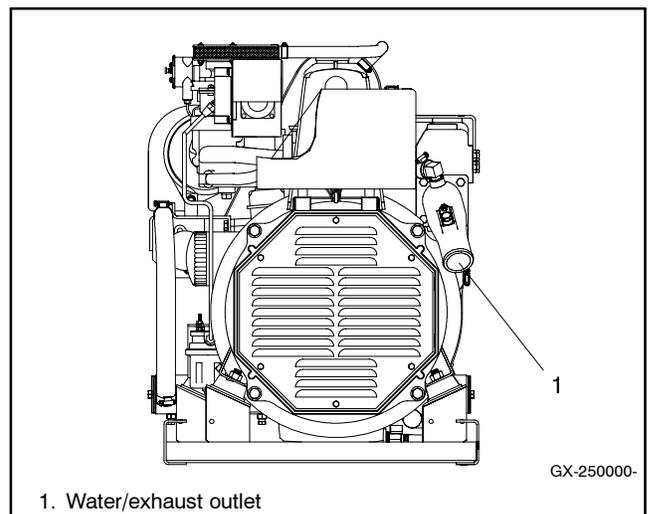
Mixer Elbow/Exhaust Connection, 15/20C and 12.5/17.5CF
